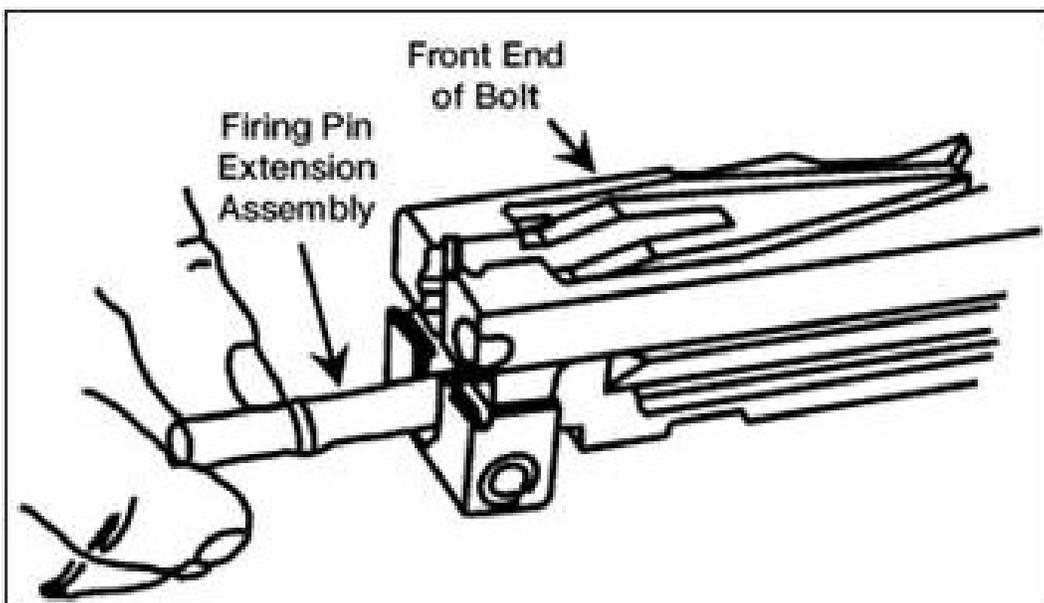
ST-1025_15 (Removal of the firing pin extension assembly)
